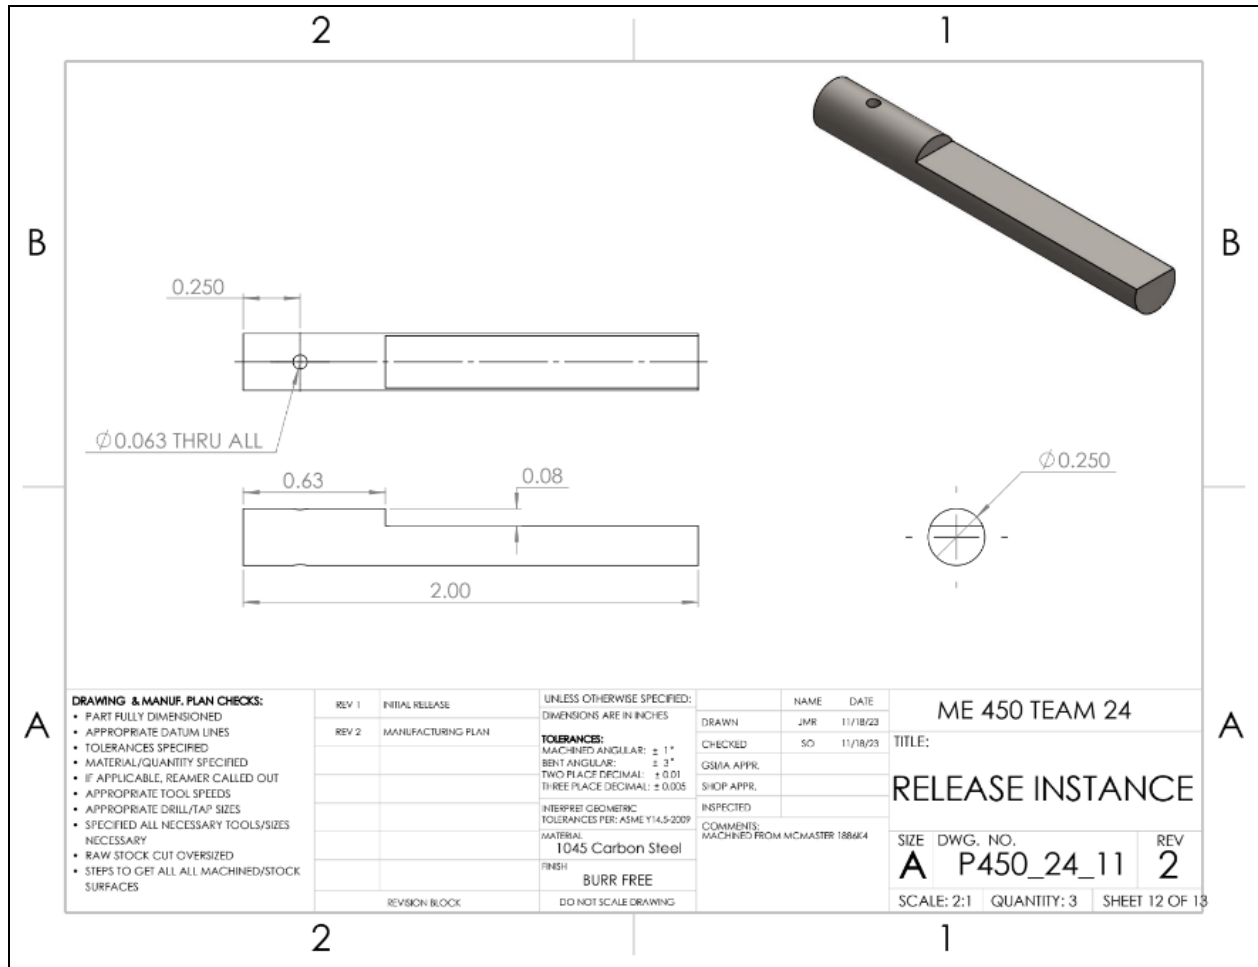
Manufacturing drawing for the release instance components of the beta design.
